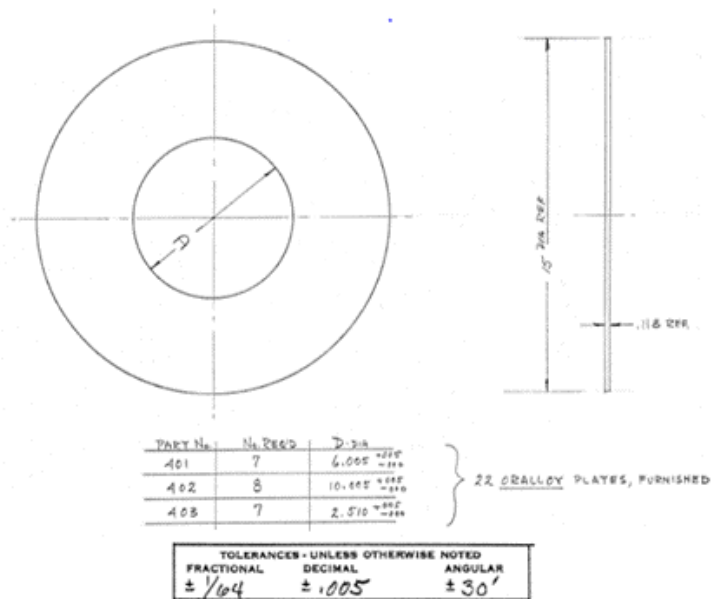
Engineering Drawing (19Y-29621-D27) of the HEU Rings: HEU 15/6, and 15/2.5 (Dimensions in Inches).
